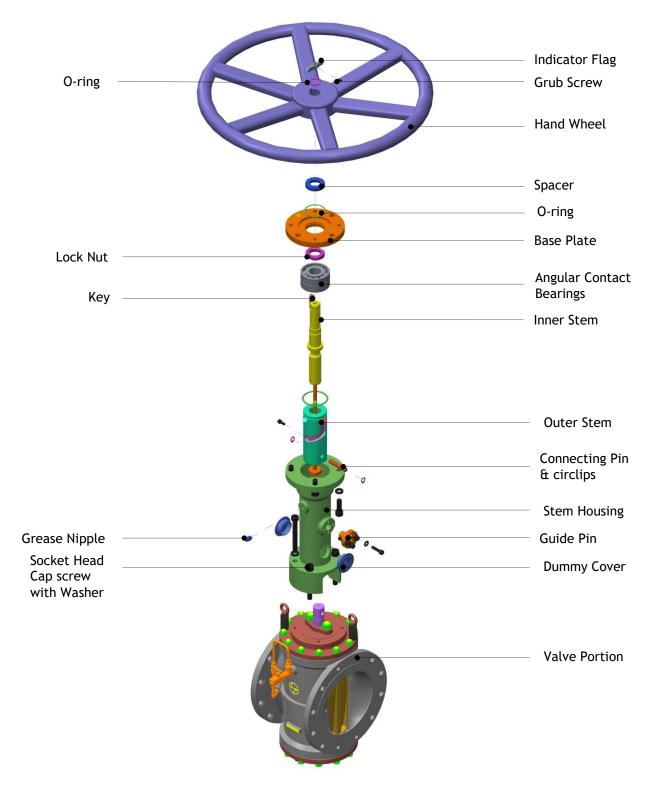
Exploded view - Double Block and Bleed Valve (Hand wheel operated Portion)
